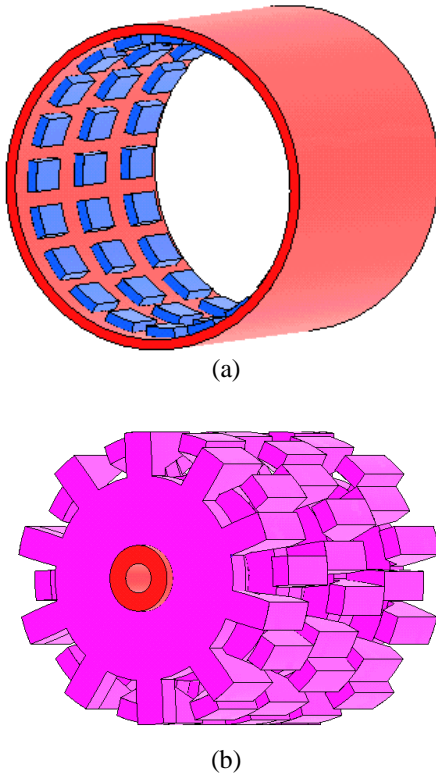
The magnetically relevant parts of claw pole motor: (a) outer rotor, (b) SMC stator
